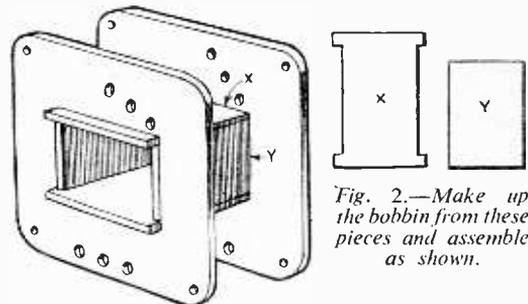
Make up the bobbin from these pieces and assemble as shown.
